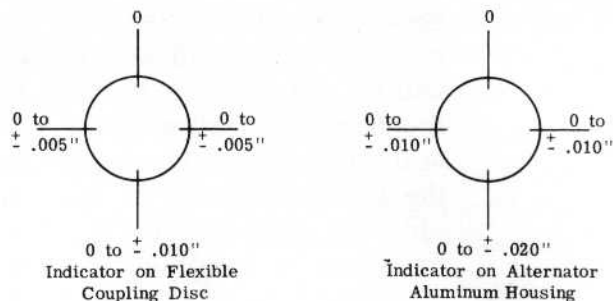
Dial Indicator Alignment Tolerances Model D12A, B, C and D Generators
